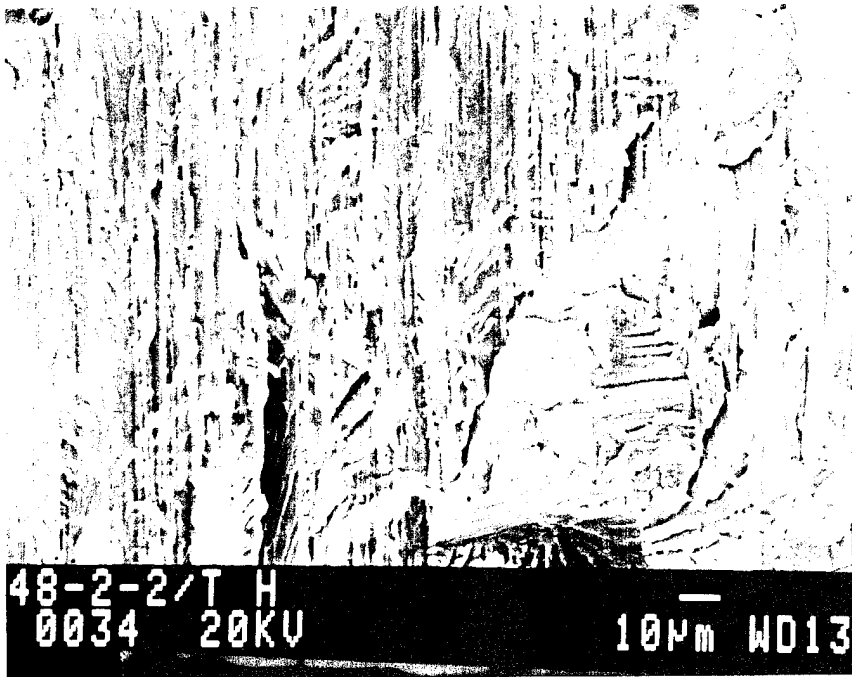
Fracture surface of tension specimen pre-exposed to hydrogen.
